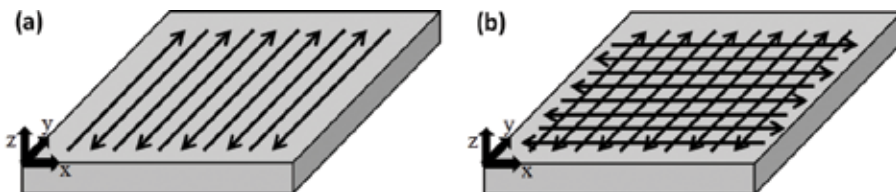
Sketch of the laser passes: (a) parallel stacking and (b) cross stacking.
